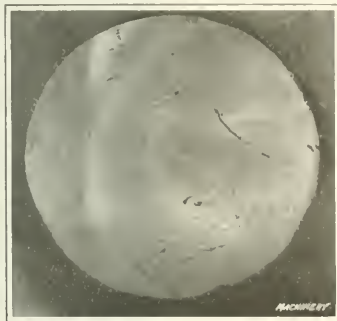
Section of Defective Weld in Steel Bar
